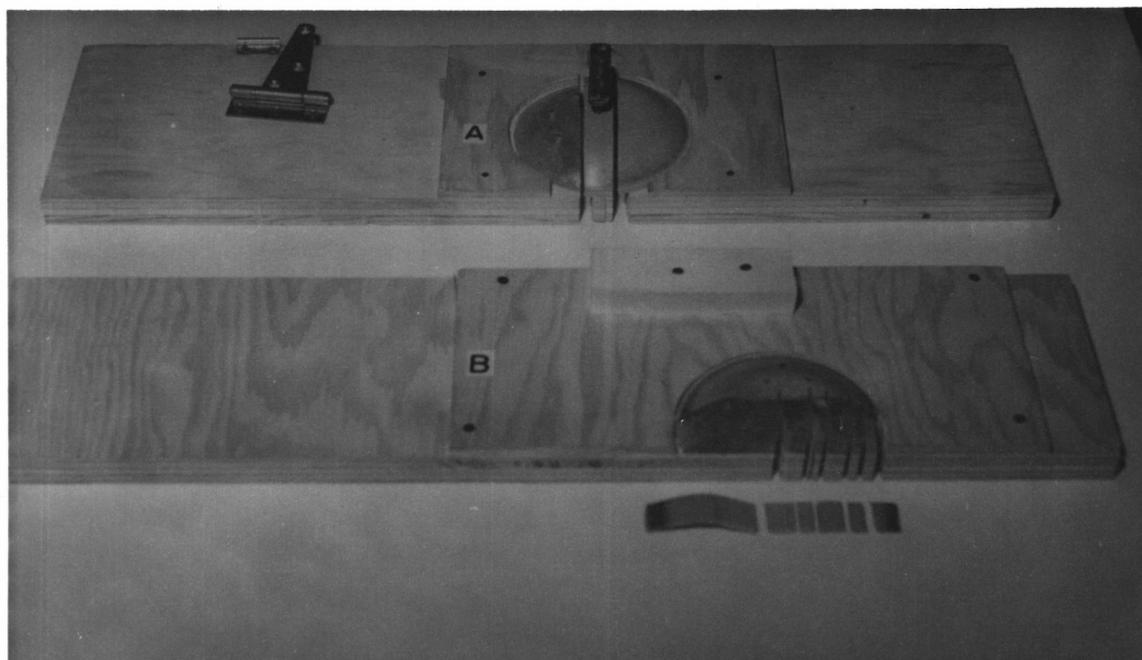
A. Jig for holding moldings during the cutting of test pieces. B. Jig for supporting the center strip, cut on A, while the three specific gravity wafers are cut.
